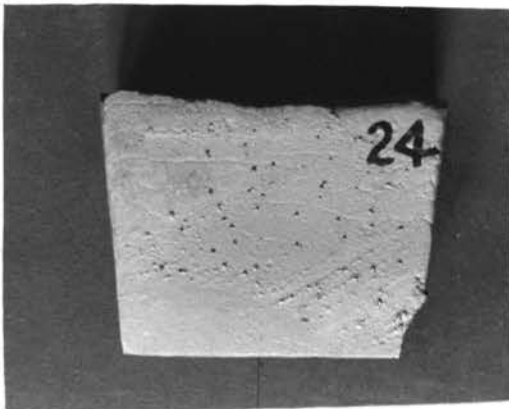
Photographs of surfaces of castings poured in molds containing silica sand and +100 mesh magnetite.
